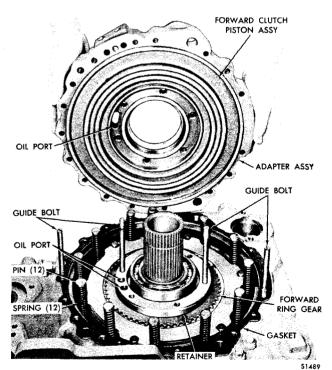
Installing rear housing adapter assembly (-3 underdrive model)
